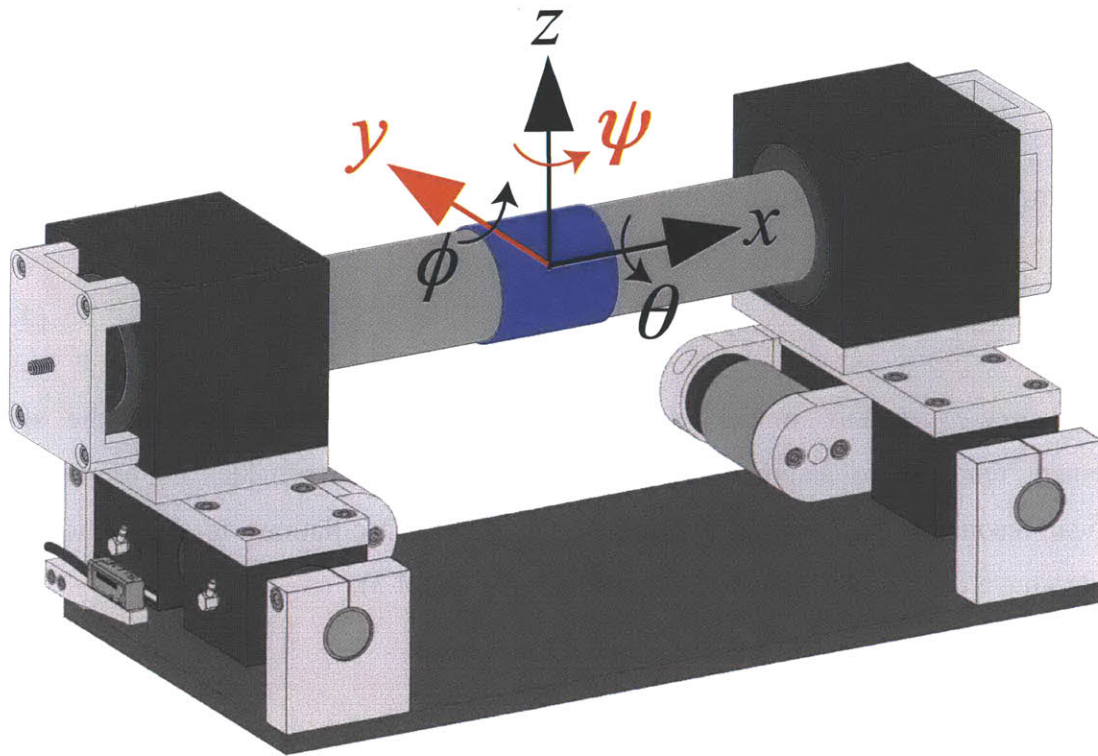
Two-D.O.F. print head model: The print head is able to move along linear guide rods in the y direction, and slewing bearings on either side allow for angular slew ψ about the z axis
